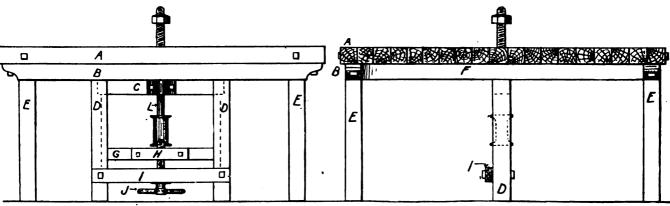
SHOWING SIDE AND END VIEWS OF WOOD-WORKING SHAPER.
